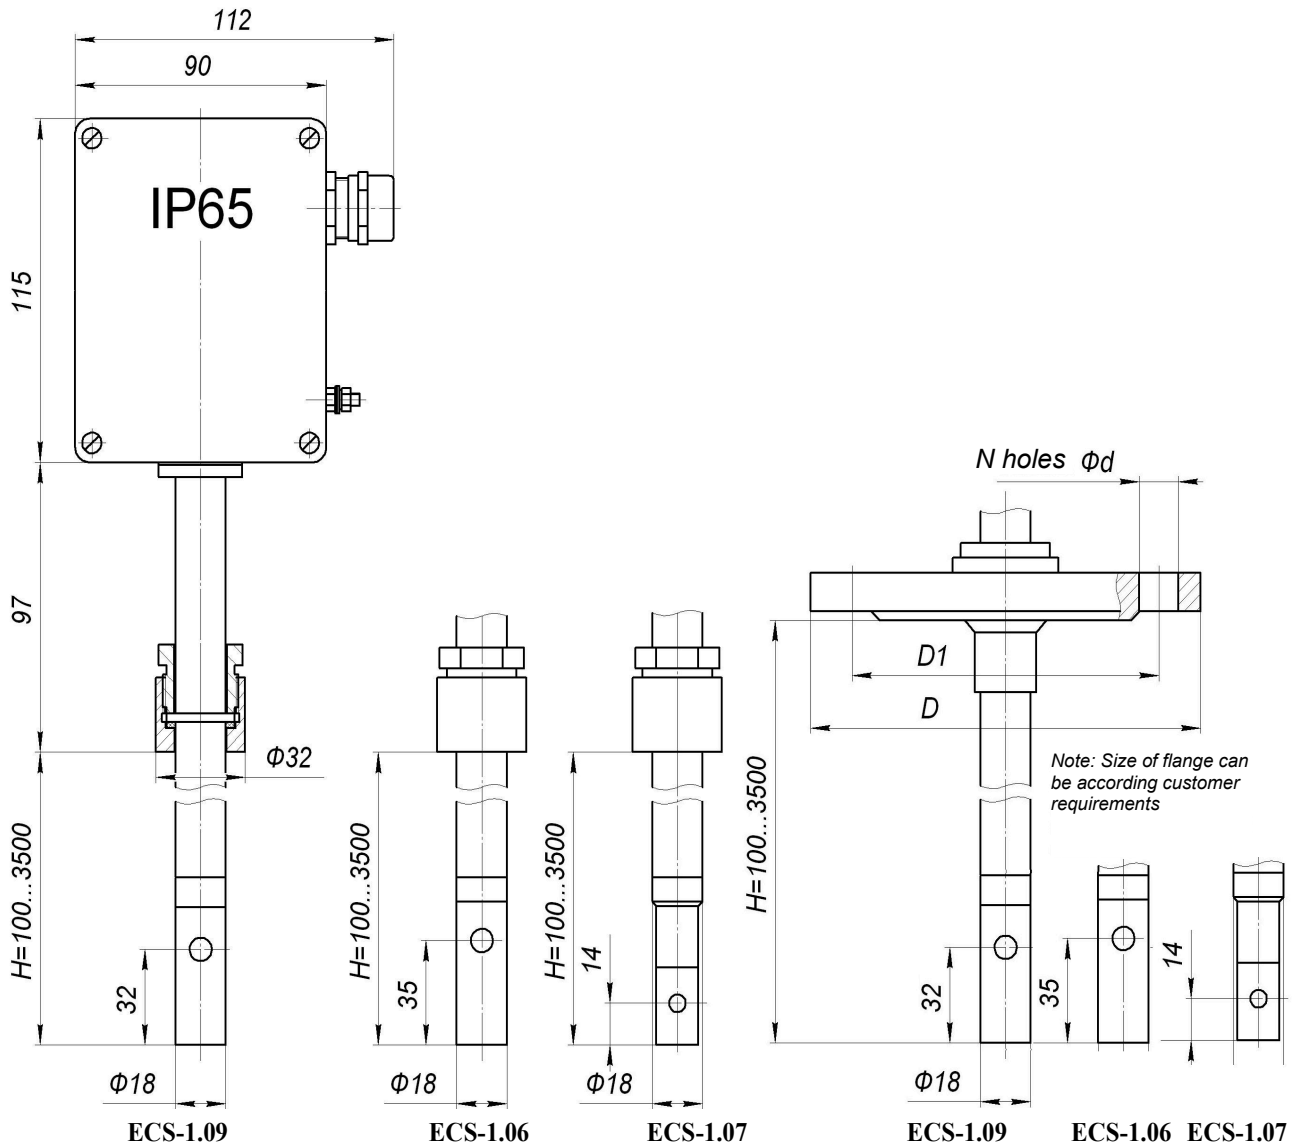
Overall and mounting dimensions of the submersible primary transducers of the (shown with the housing type "D", but may be with cases "N" and "I").
